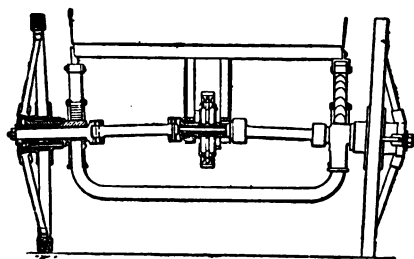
De Dion & Bouton Transmission Gear (Sectional Elevation).
